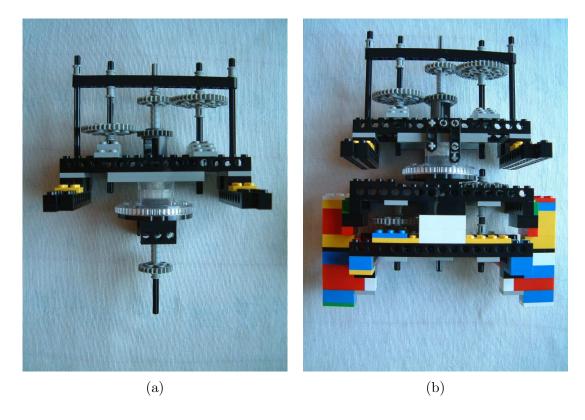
(a) The assembly of the upper transmission with the sun gears, and (b) the assembly of the lower transmission into the system
